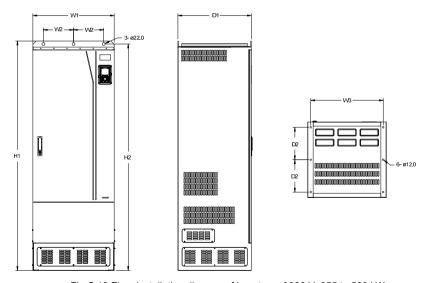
Floor installation diagram of inverters of 380 V, 355 to 500 kW
